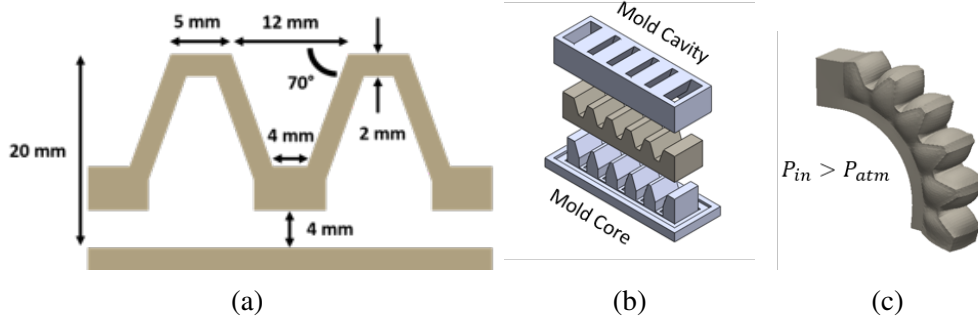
Design approach for the soft actuator and mold parts. (a) Cross-section of the SPA with representative dimensions; (b) core and cavity sides of the 3D-printed mold; (c) inflation state of the SPA.
